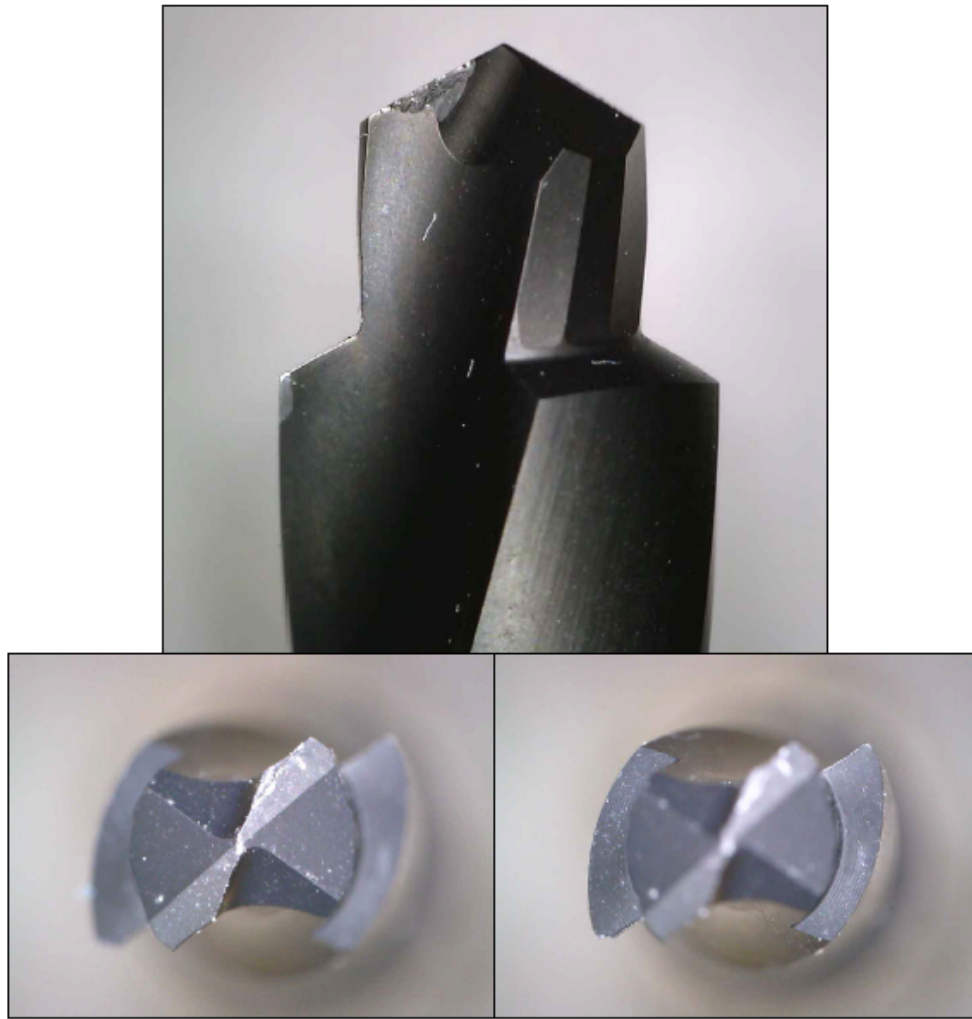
Tool wear after 110 holes (pneumatic machine) - Tool sample 2.
